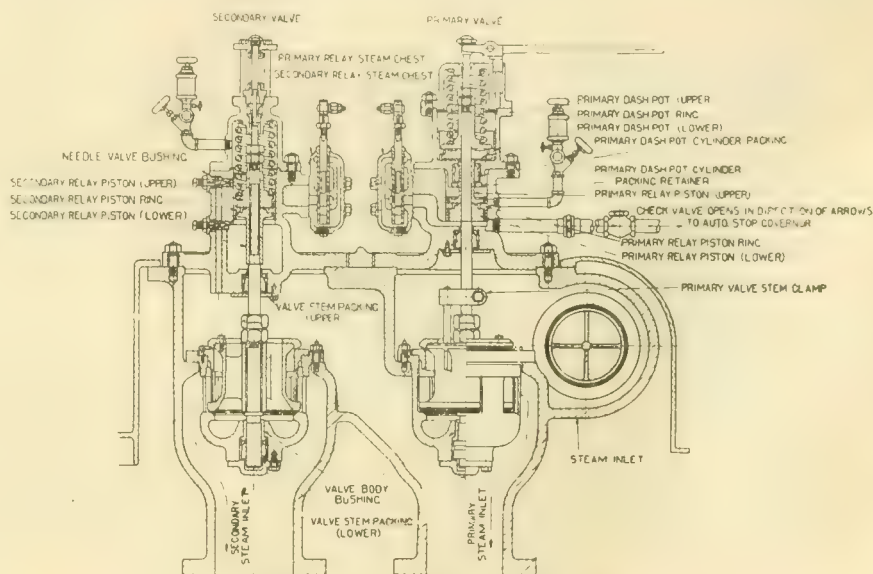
SECTION OF VALVE CHAMBER OF A STEAM TURBINE. Showing steam relay type of valve gear.
